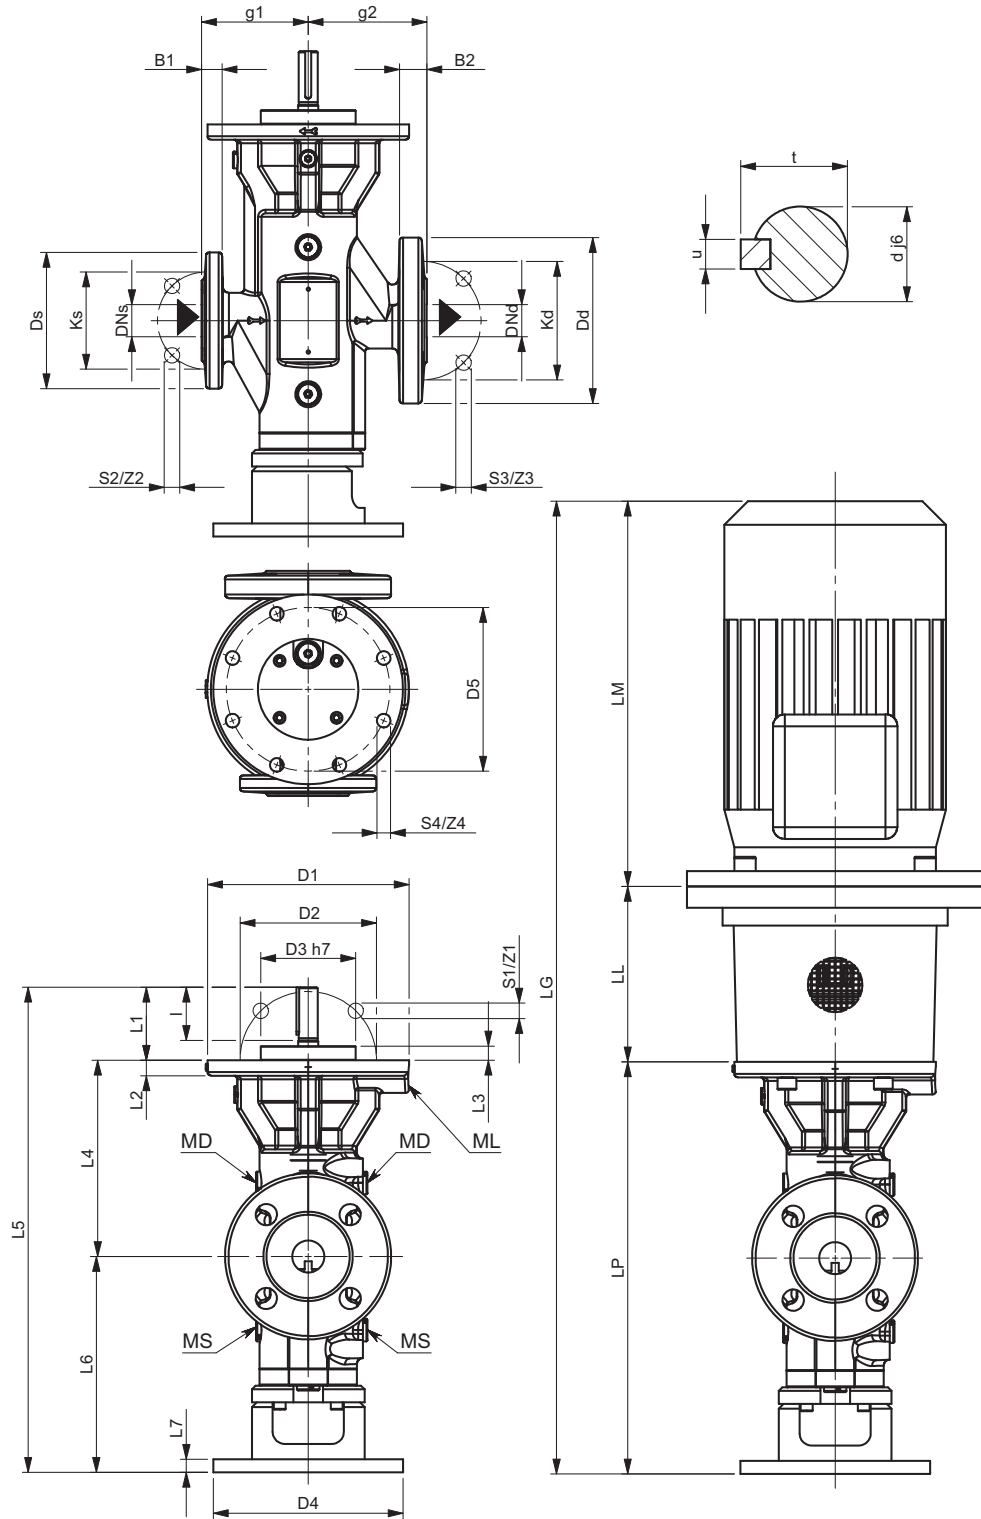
Dimensional drawing of LVI-pump and pump unit
